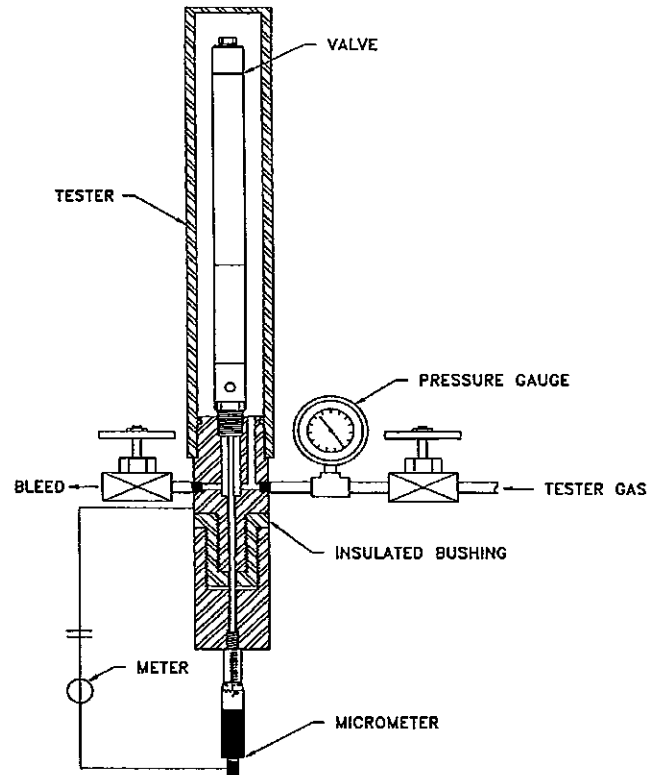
Typical Gas Lift Valve Probe Test Fixture
